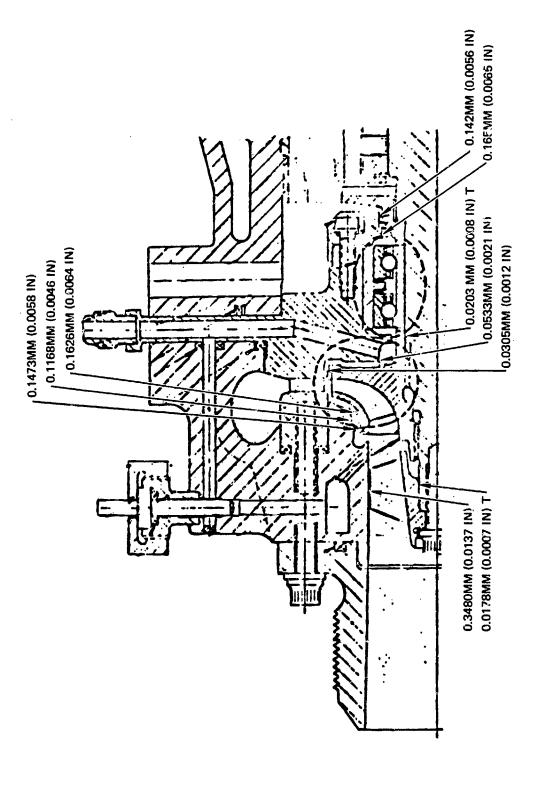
Mark 48-0 Turbopump S/N 03-0 Pump Seal Diametral Clearances and Pilot Fits
